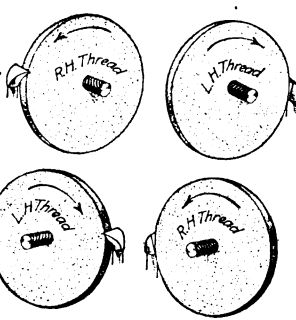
BE SURE THAT THE SPINDLE NUT TENDS TO TIGHTEN
